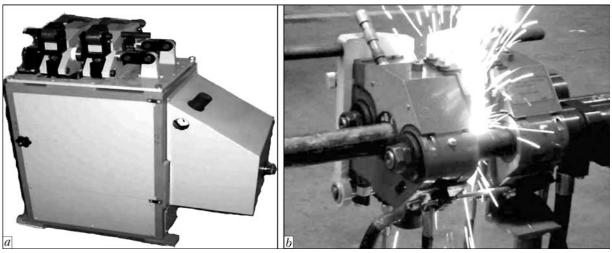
Machine MD101 (a) and machine MD1 in operation (b)
